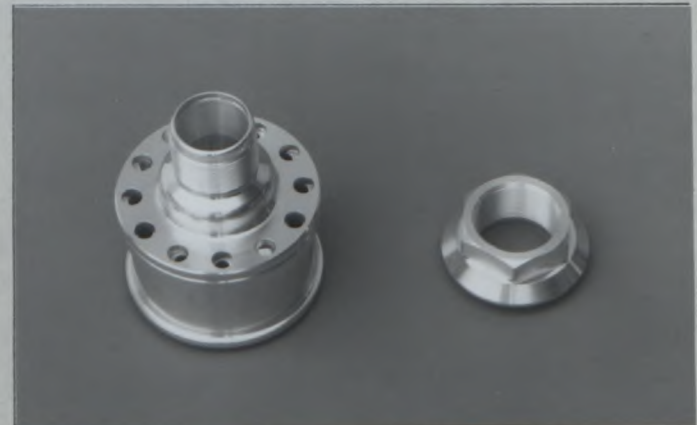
CENTRAL WHEEL BOLTING SYSTEM, TYPE B
